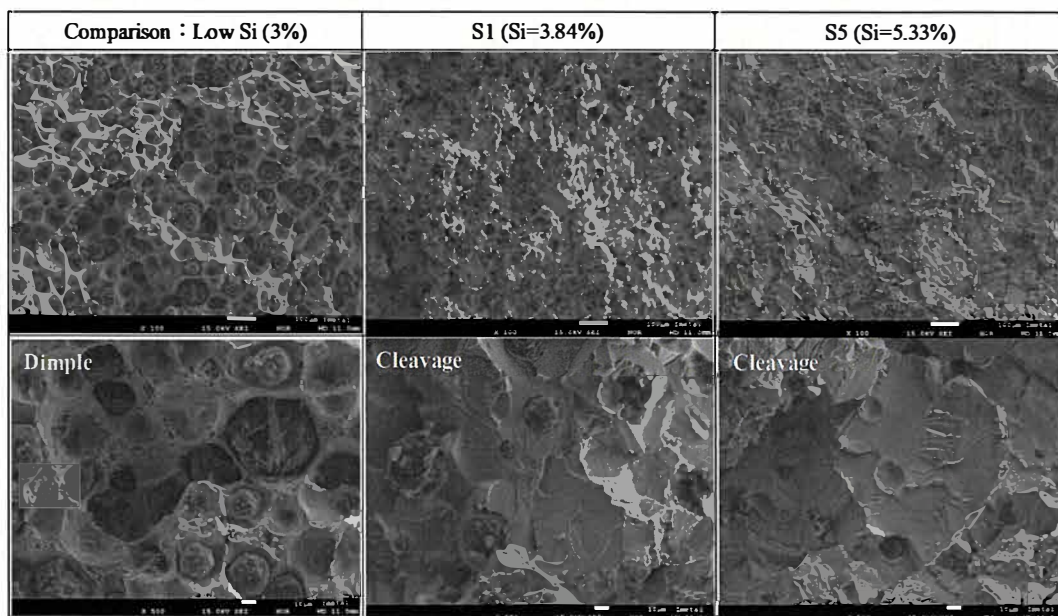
Fractured surface photograph of after tensile test by SEM.
